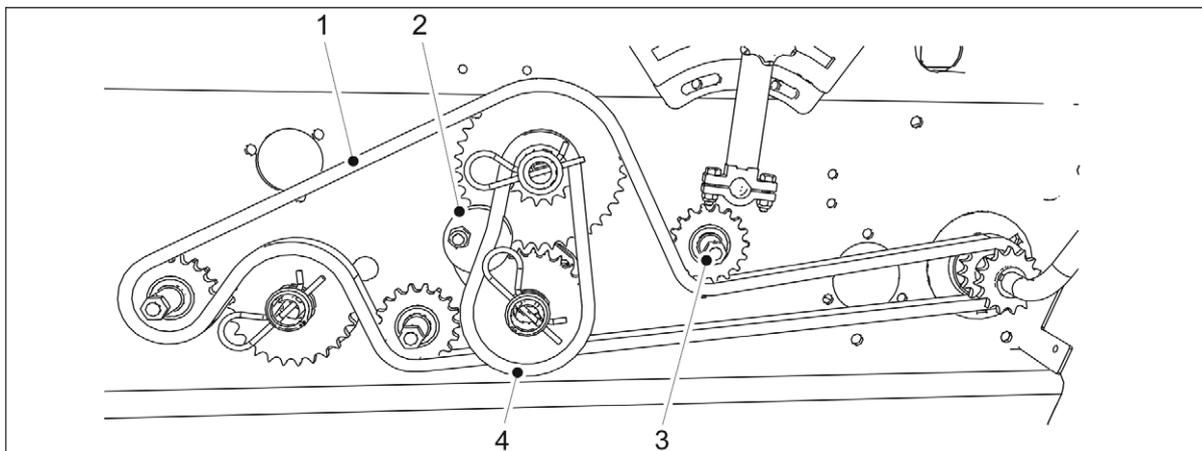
232. Tightening the chains in a machine without a gearbox
